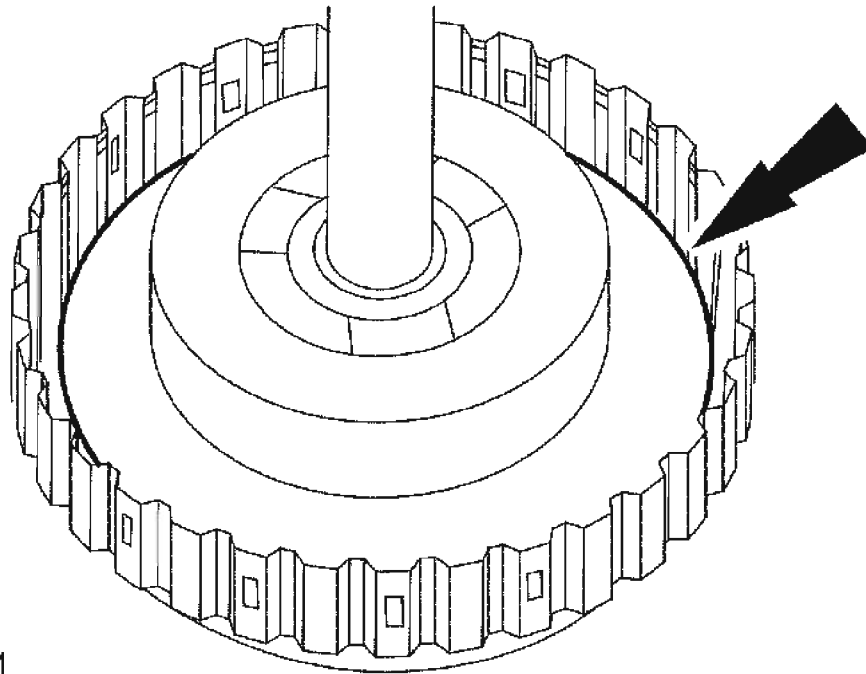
Removing Forward Clutch Balance Piston Snap Ring Using Special Tool
